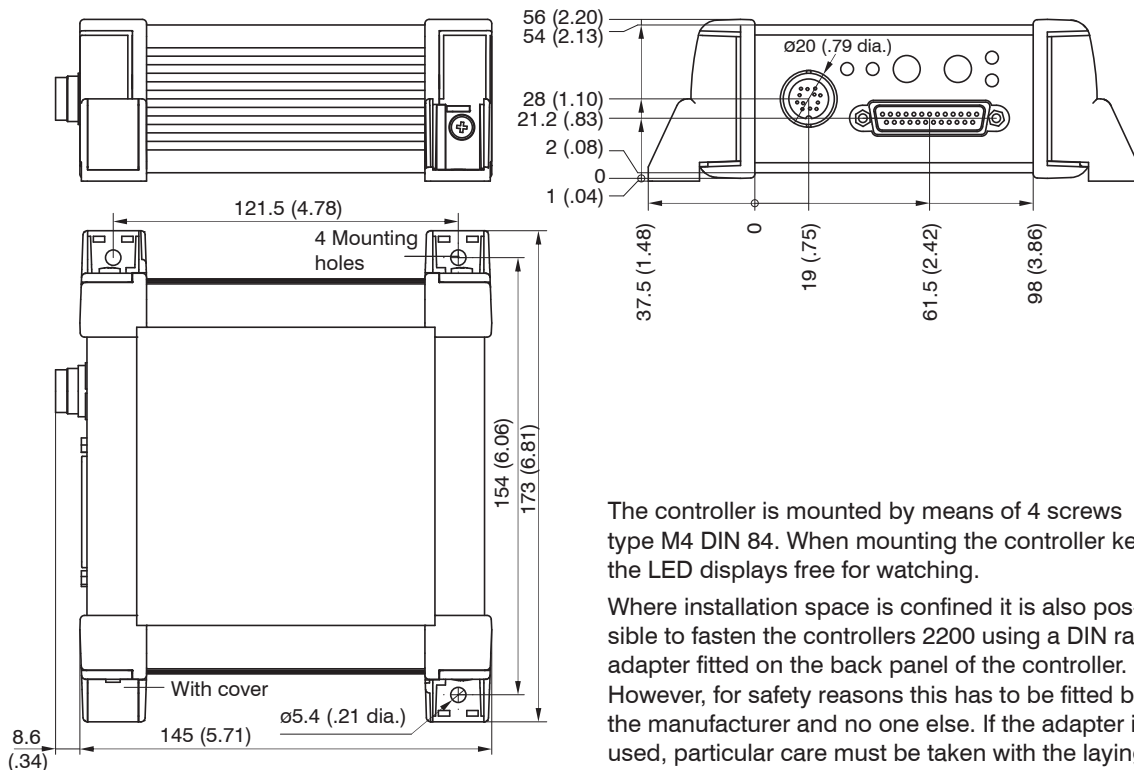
Controller dimensions with mounting angle, dimensions in mm (inches), not to scale
